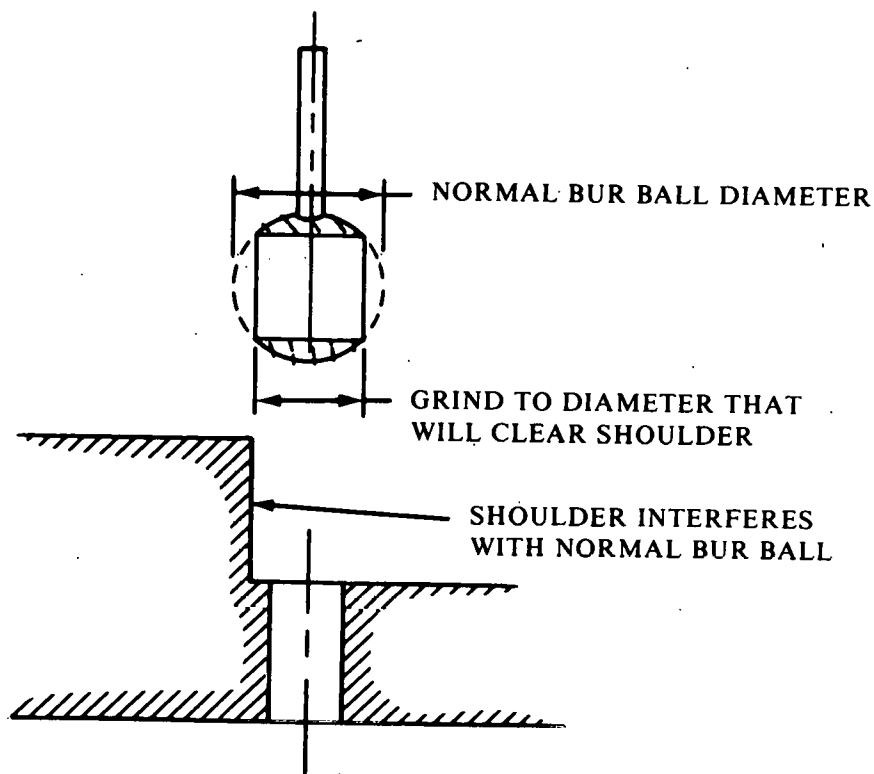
Bur Ball Altered to Finish Hole Next to Shoulder
